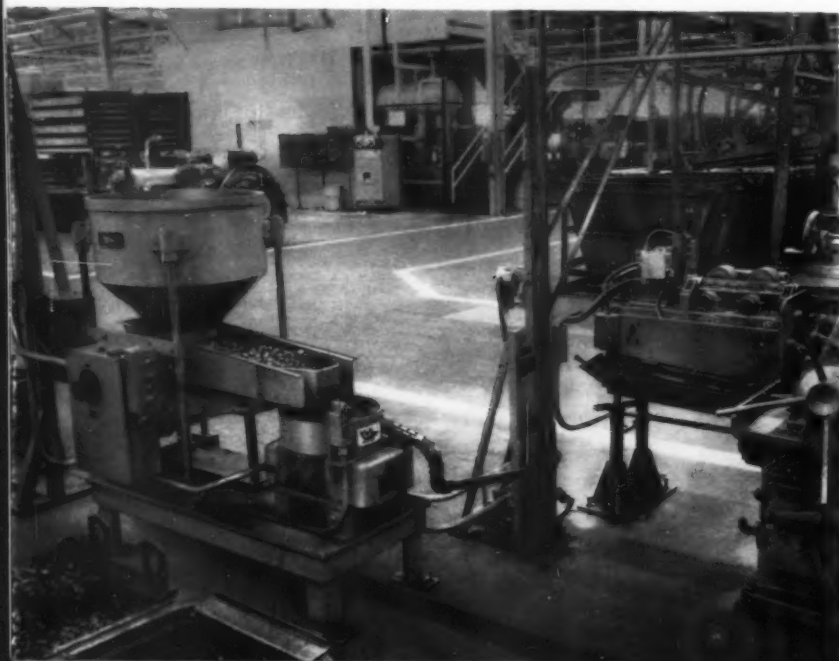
Outside diameters of races are reduced to between 1.0630 and 1.0633 inches by passing the parts through three centerless grinding machines.
